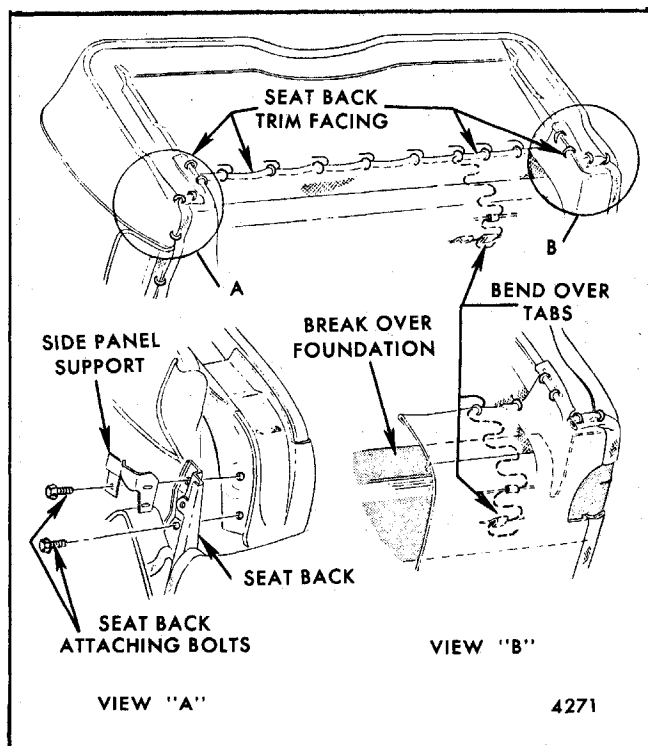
Front Seat Back Attachment - "A and X" Four-Door Styles with Full Width Conventional Seat
